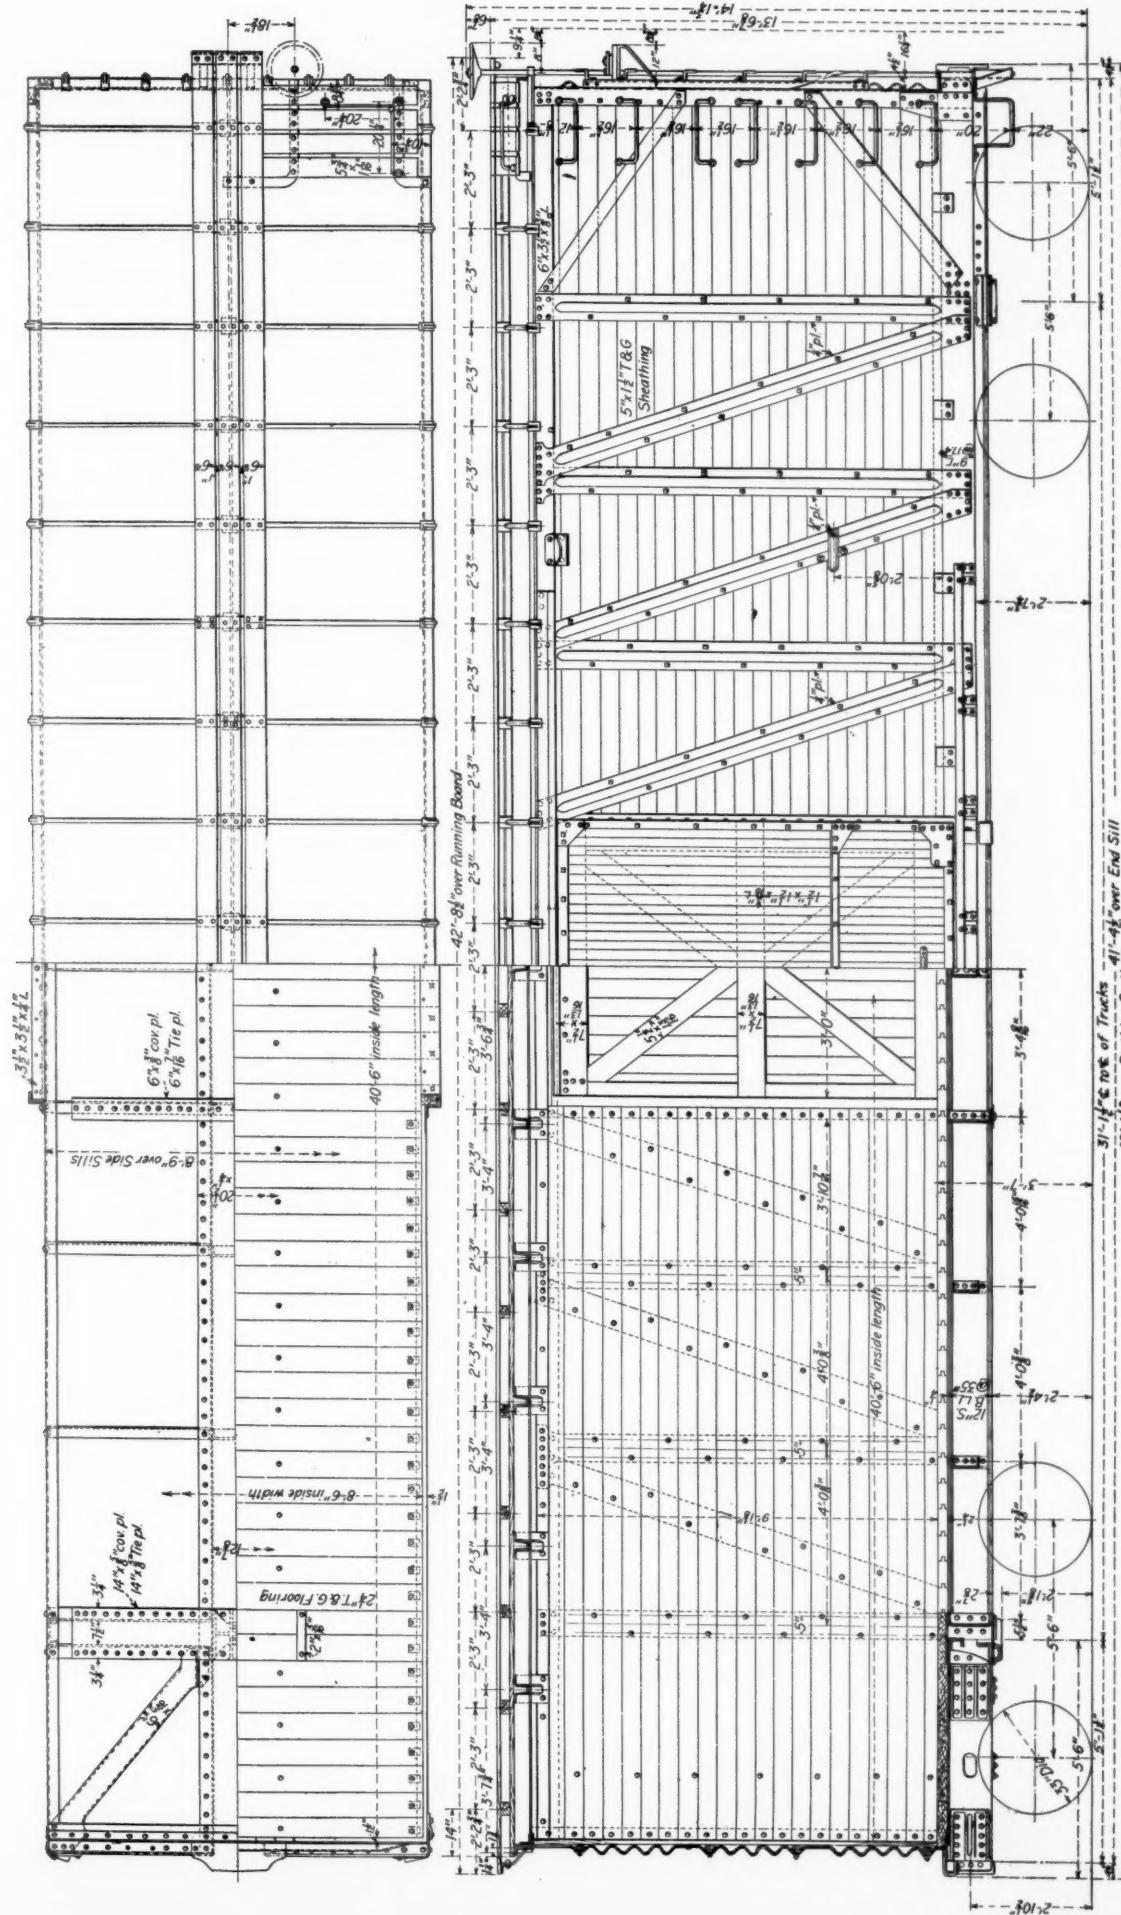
General Plan for the Standard 40- and 50-Ton Steel Frame, Single Sheathed Box Car
